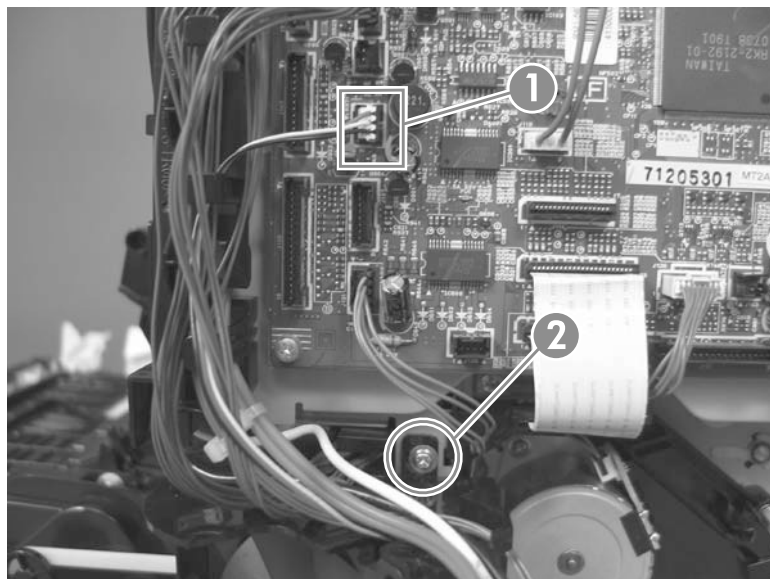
Remove the tray-pickup drive assembly (2 of 10)
